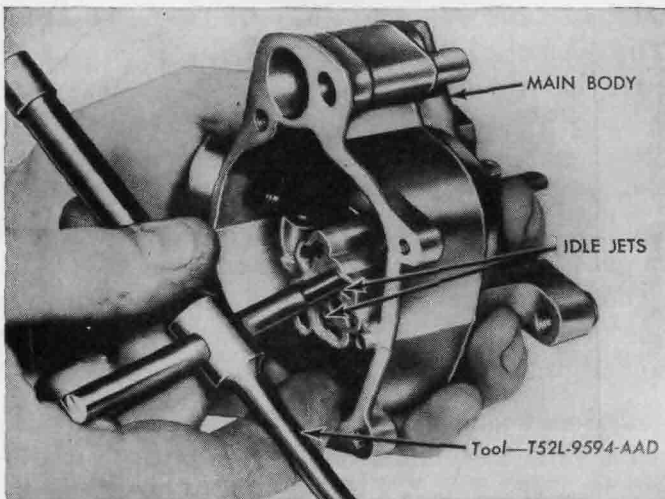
Using jet wrench to remove idle jets. (Ford Motor Company)
